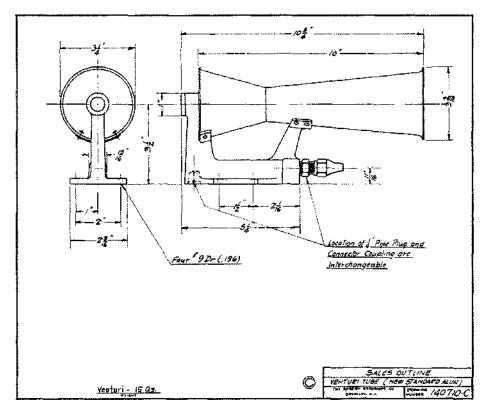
OUTLINE DRAWING OF THE VENTURI TUBE
